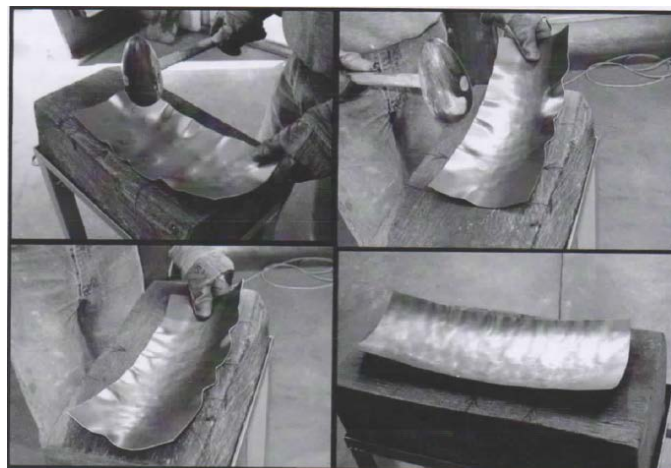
Double curvature produced in sheet metal using tucks
